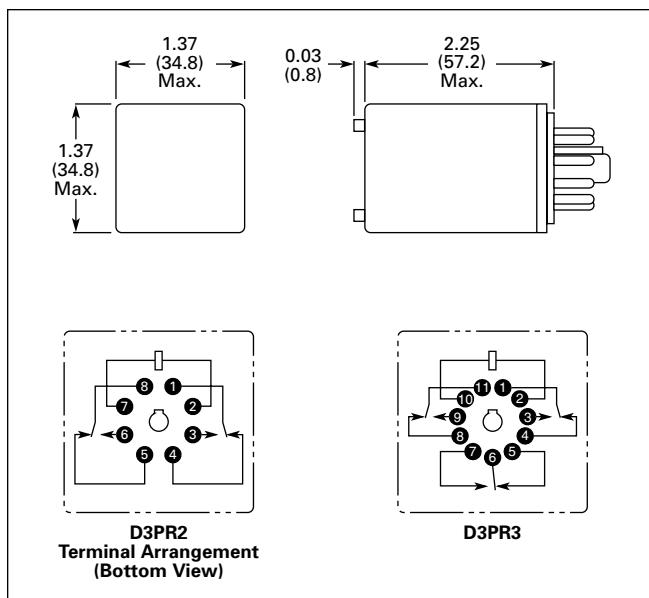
D3PR2/D3PR3 — Approximate Dimensions in Inches (mm)
